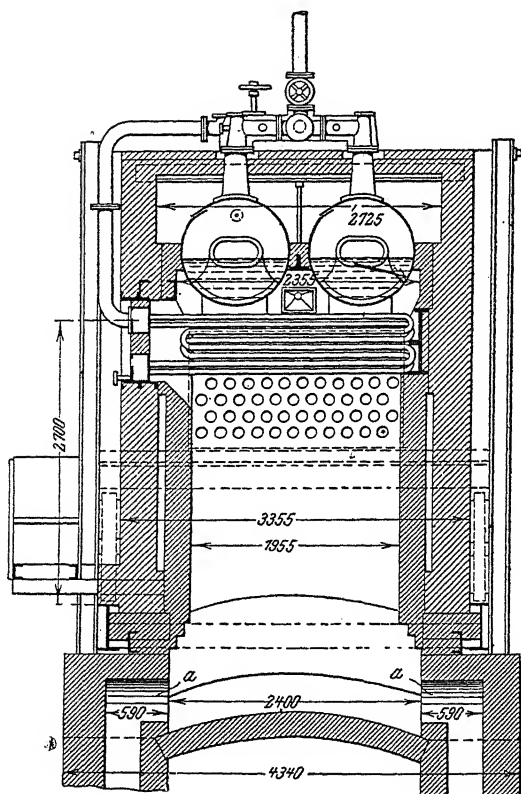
WASTE-HEAT BOILER, DÜRR TYPE, OVER
